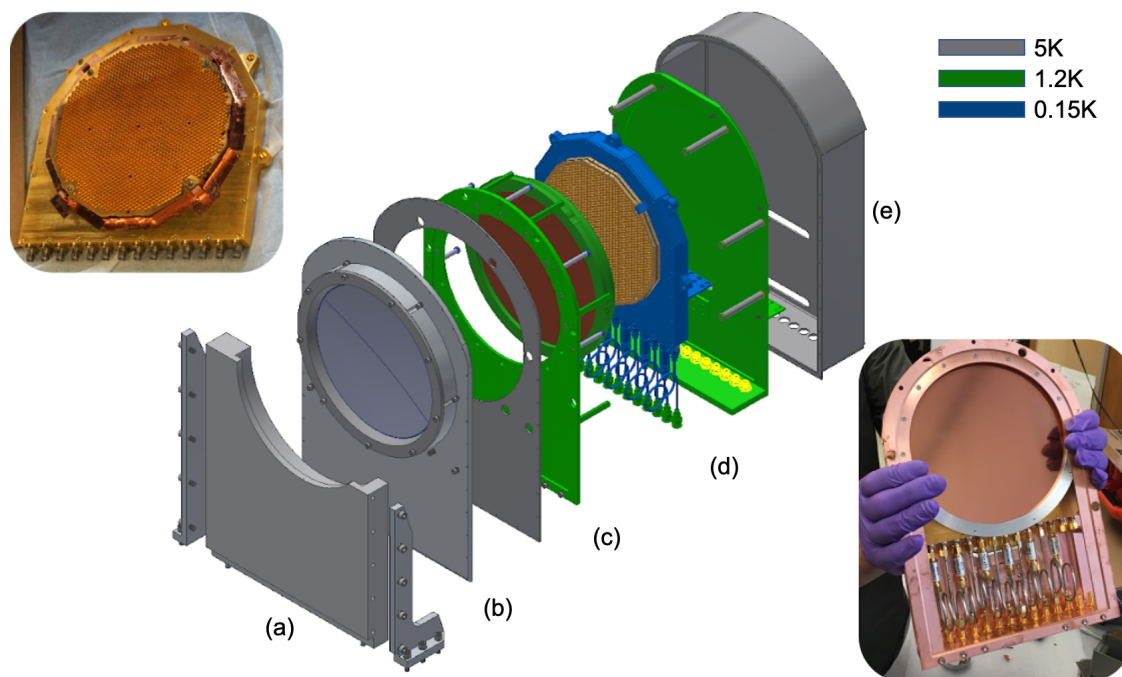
An exploded view of the 1.1 mm array detector assembly. The assembly is composed of: (a) an aluminum mount that bolts directly to the aluminum optics bench, (b) a silicon field-flattening lens, (c) a low-pass filter which serves as the aperture to an enclosed 1.2 K volume, (d) the silicon platelet feedhorns and detector array module at 0.15 K, and (e) a magnetic shield enclosure at 5 K. (Lower right:) A view of the 1.2 K and colder portions of the assembly showing the 14 stainless steel coaxial cables which carry the drive and sense signals to and from the array networks. These cables are hand-bent to provide the required thermal break between the 1.2 K and 0.15 K stages.
